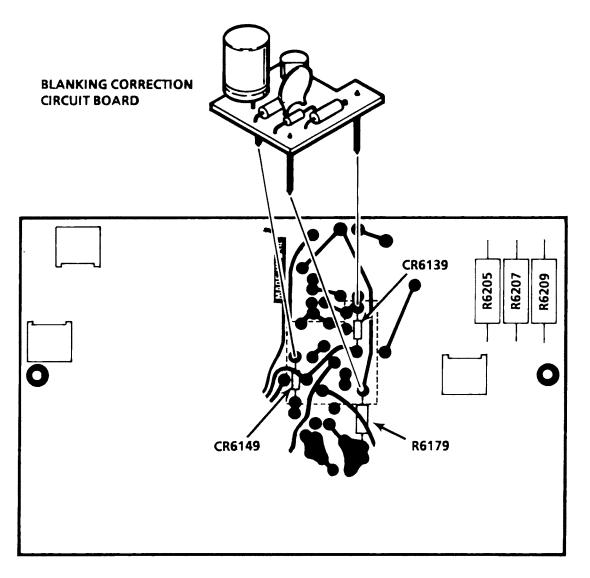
Illustration showing orientation of Blanking Correction circuit board on the Blanking circuit board.
